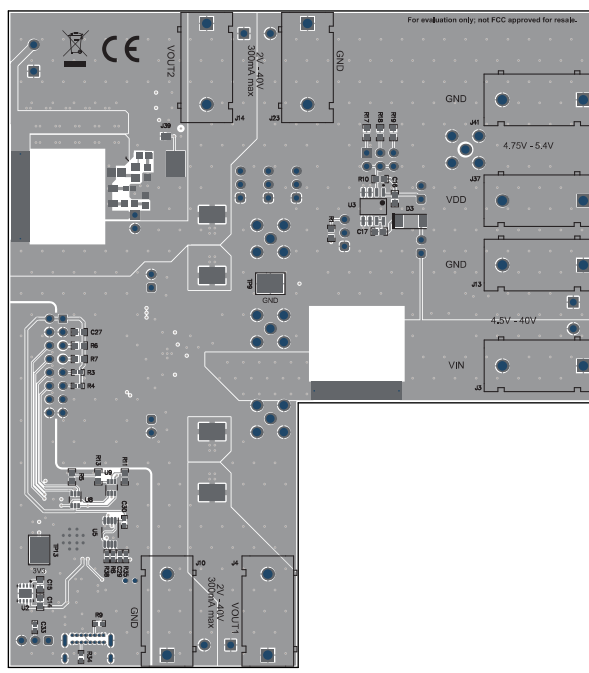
Layer 6 (Bottom Layer) - Viewed From Bottom Side
